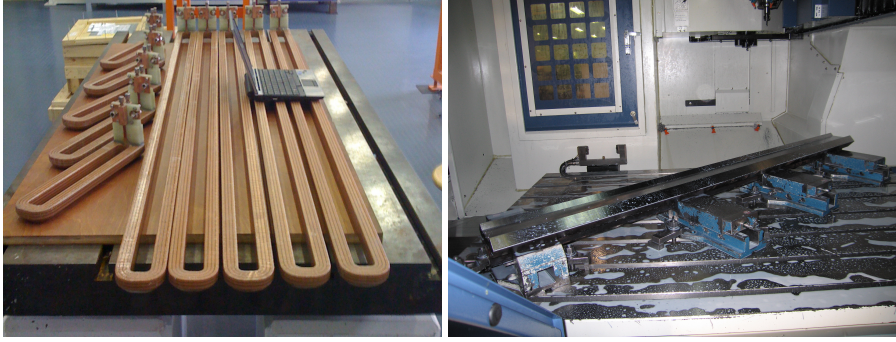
Main Beam Quadrupole prototype procurement: coils and iron quadrant (during machining)
